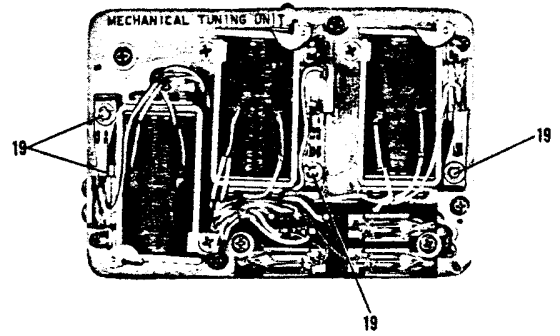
Mechanical Tuning Unit, Lubrication Points, Top View
